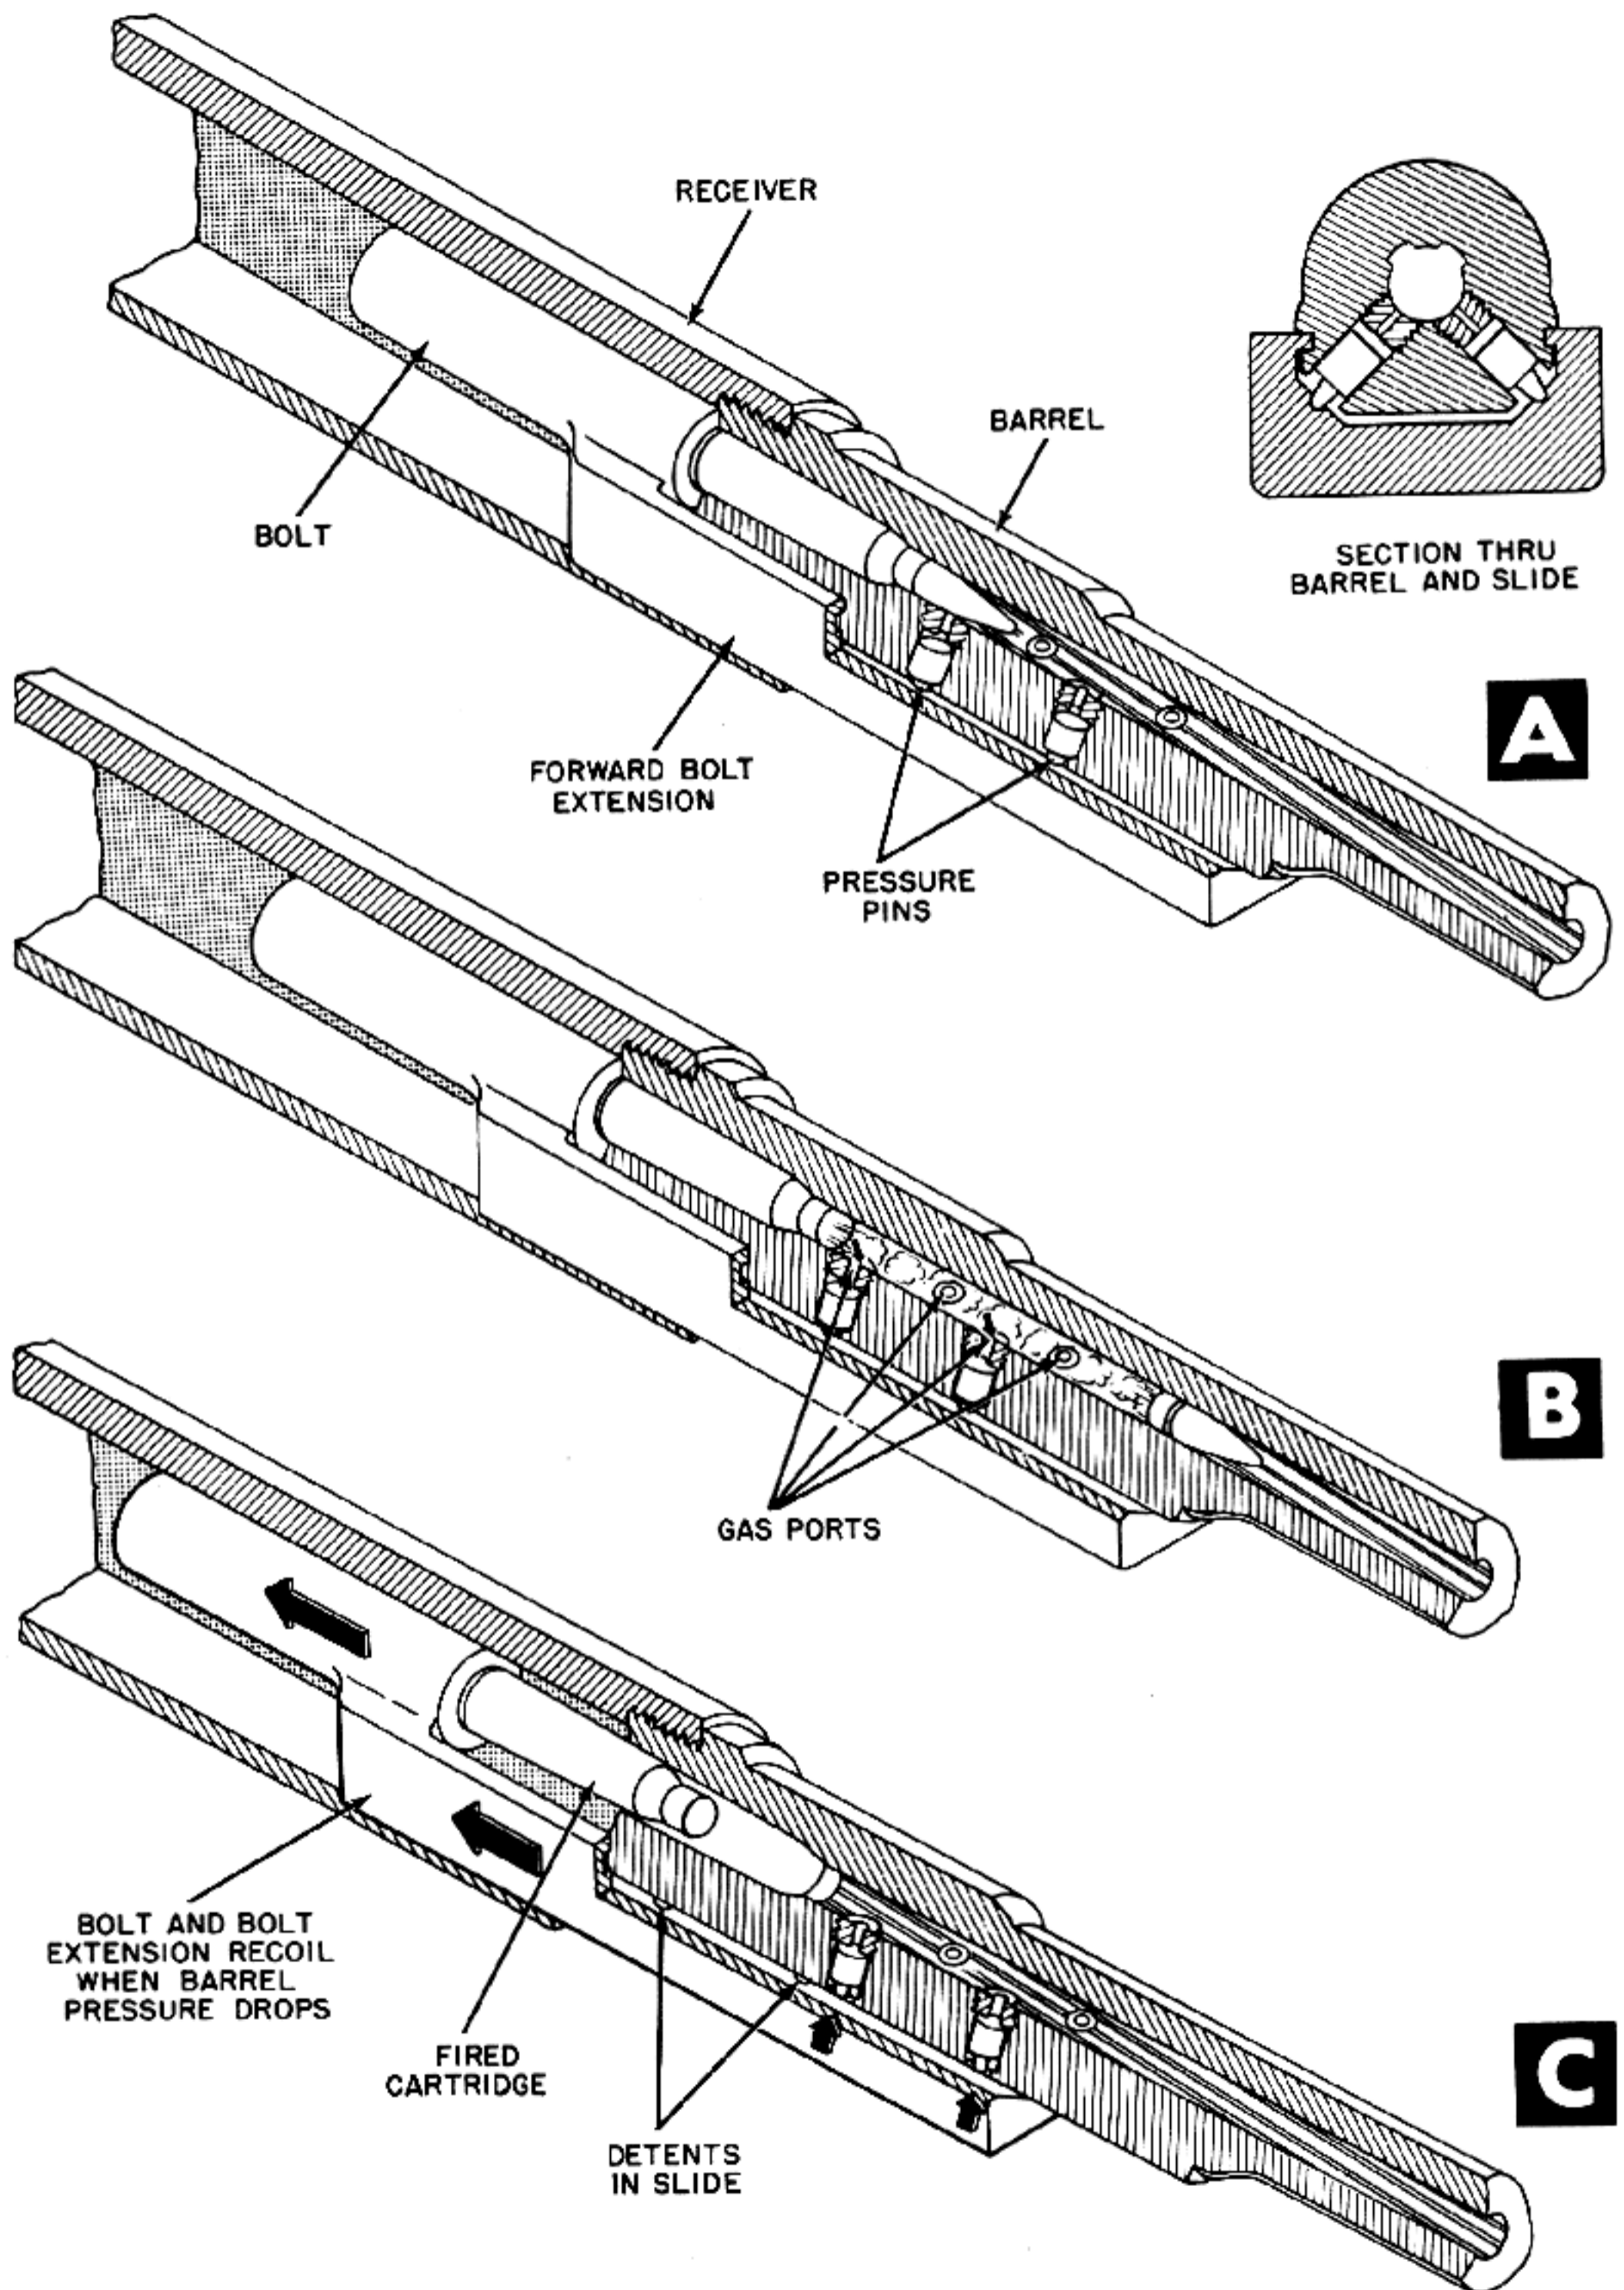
Bolt Is Locked to Barrel by Gas Pressure.
